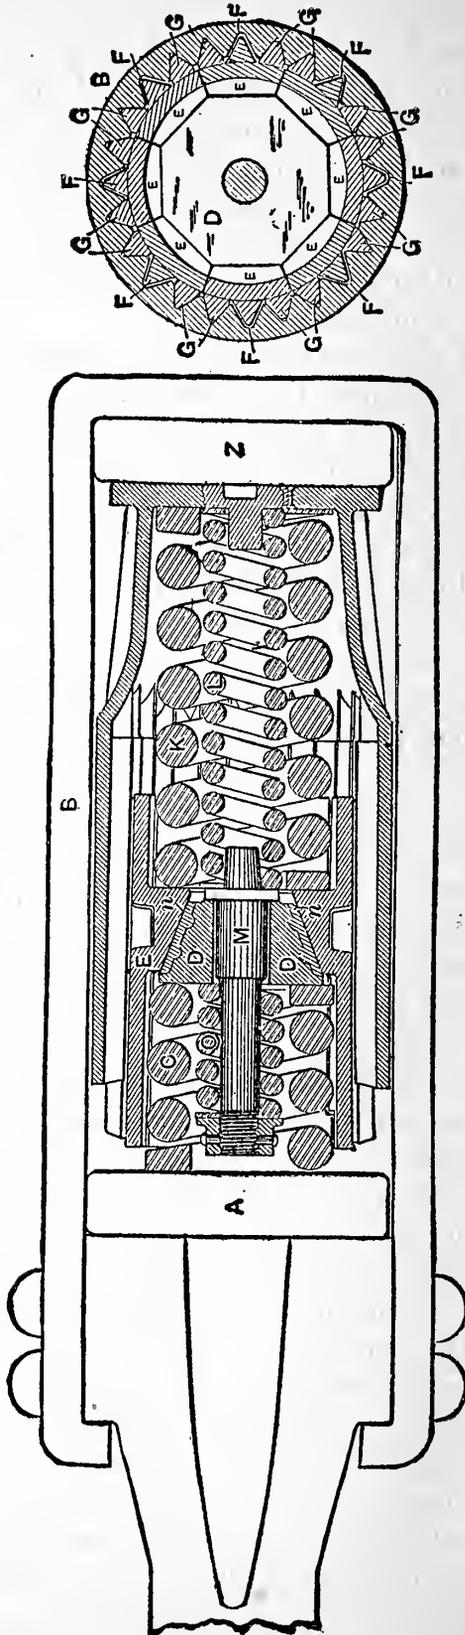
WESTINGHOUSE DRAFT GEAR. DETAILS.
